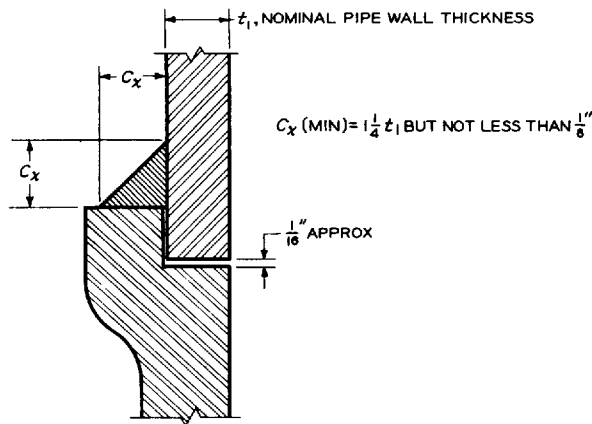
C MINIMUM WELDING DIMENSIONS
